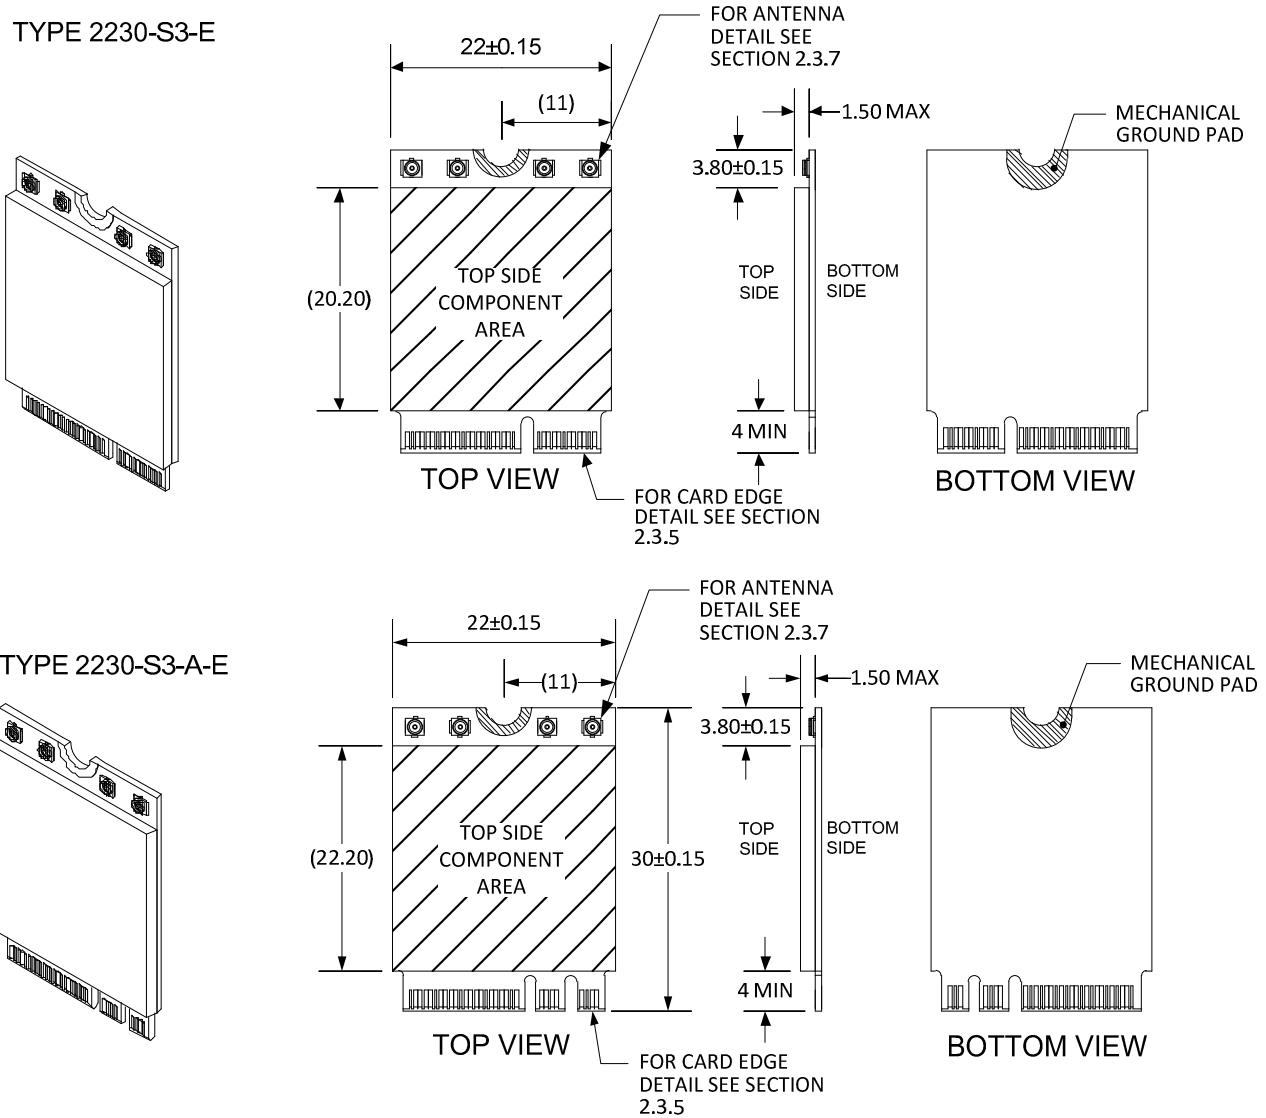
M.2 Type 2230-S3 Mechanical Outline Drawing Examples
